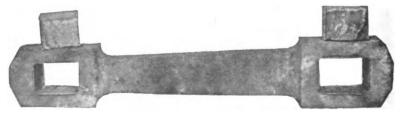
Crosshead Slots Cut Out of Drop Forging
